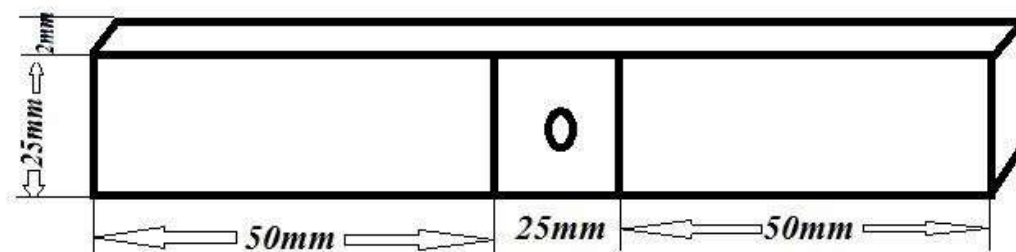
Specimen Dimensions (all dimensions are in mm)
